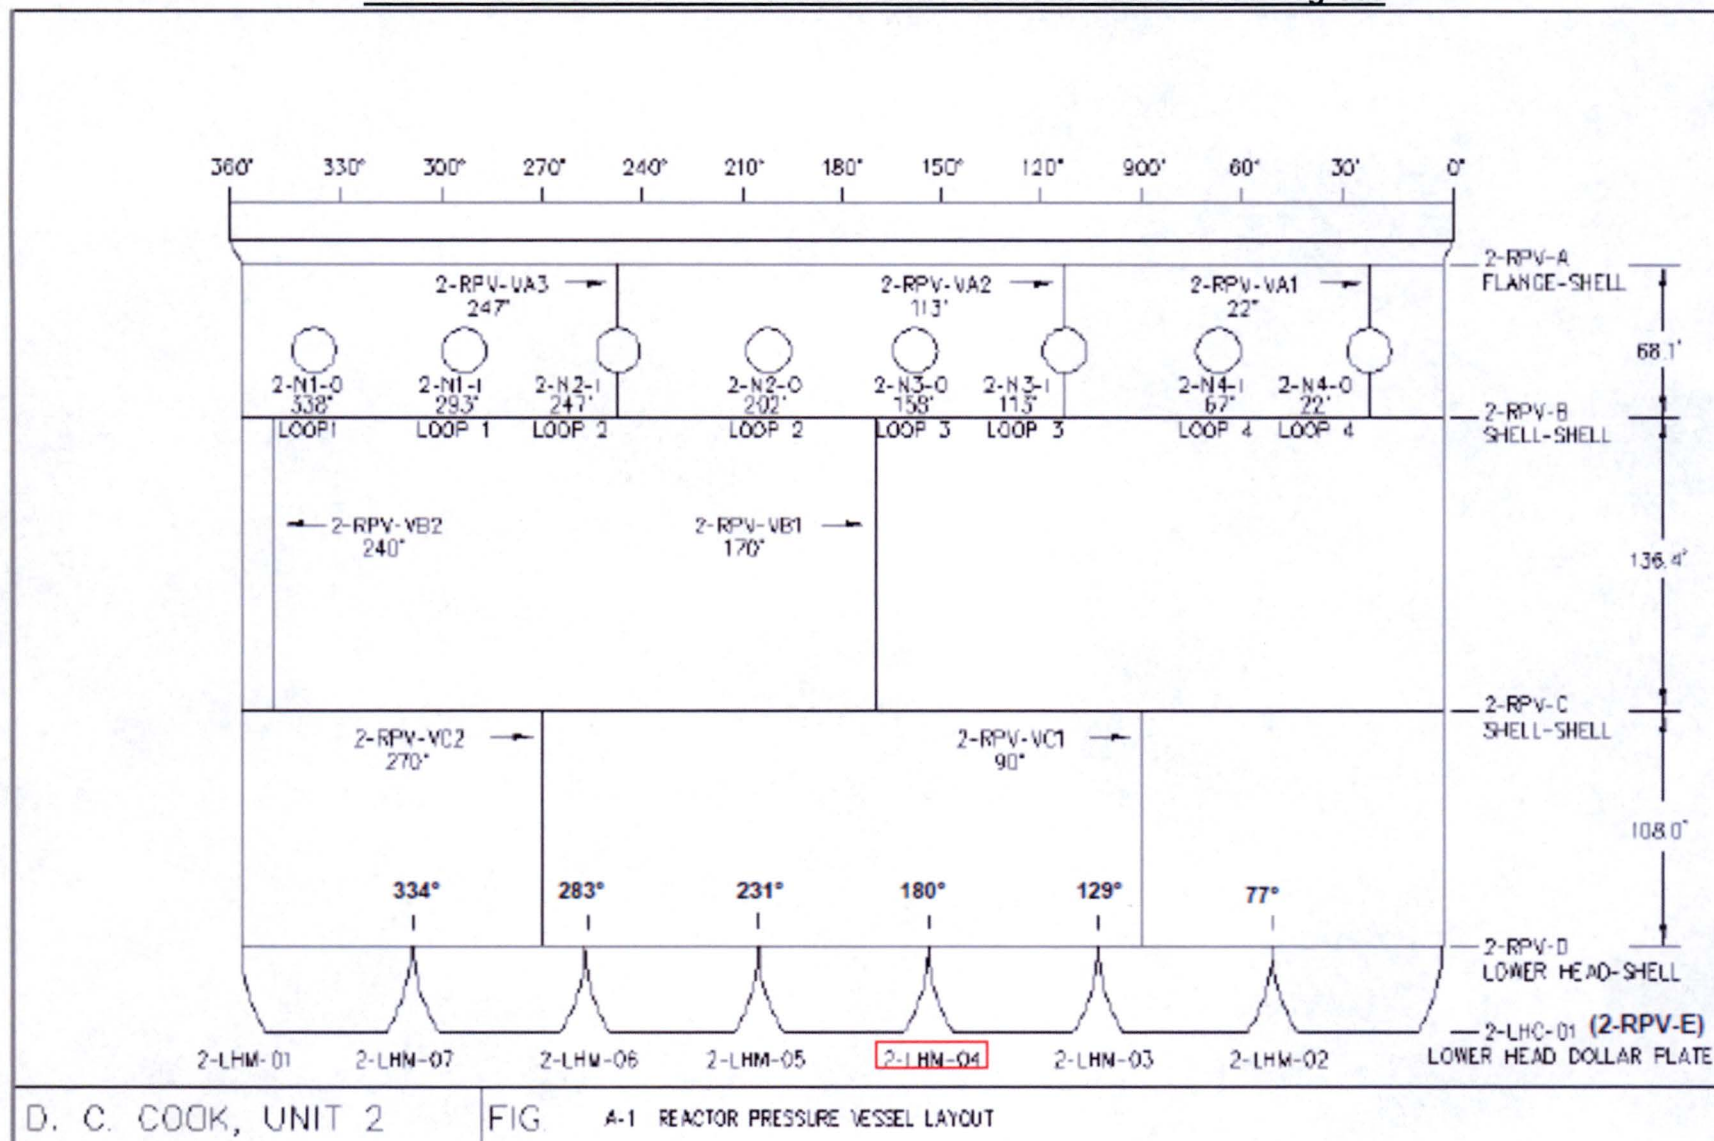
Weld 2-LHM-04 (Extracted from Reference DRAWING 2A-1)
